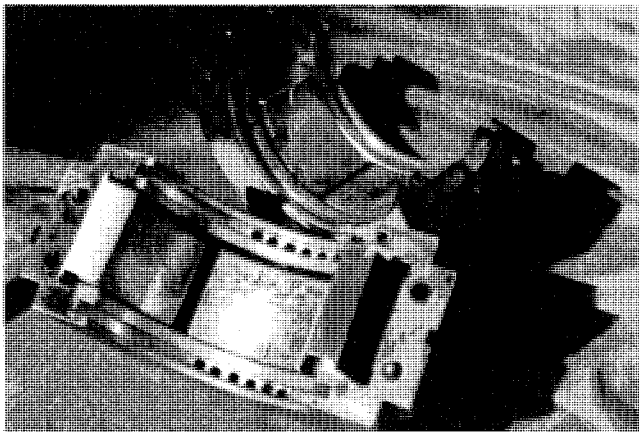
Original Tilting-Pad Journal Bearing for Turbine. Pads have babbitt fatigue damage.
